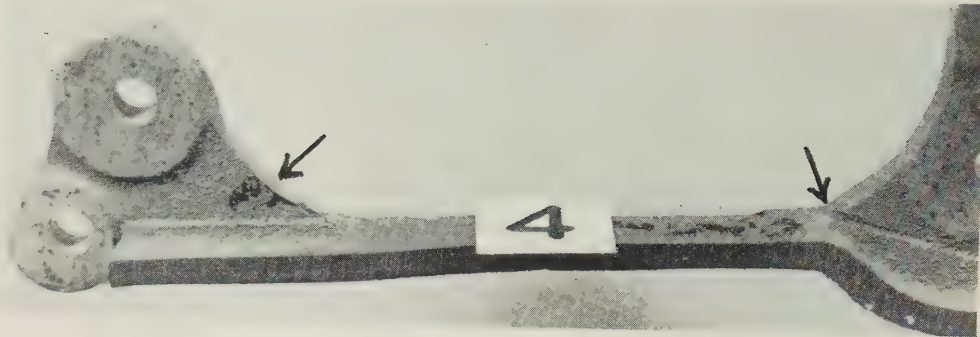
Class 1 Casting for Aircraft Construction (D.T.D. 298), Showing Cracks in Web Radii.
